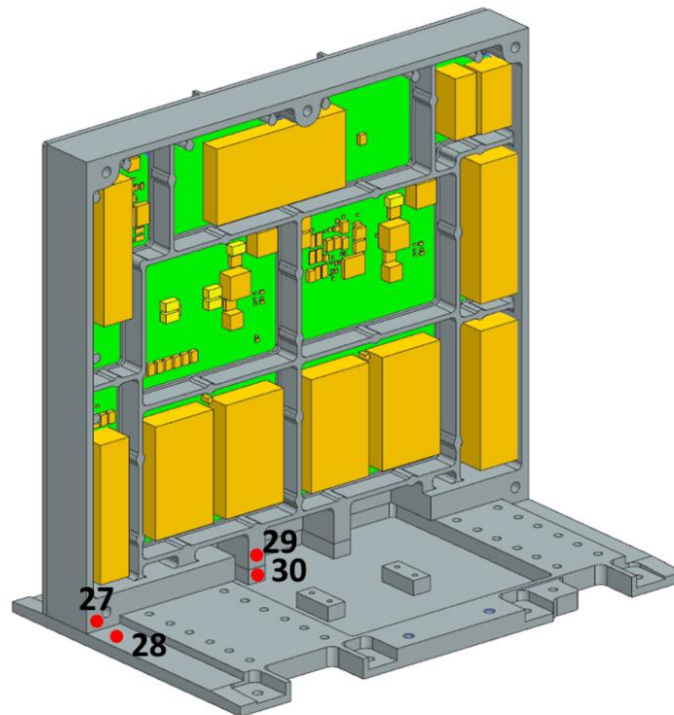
Thermocouple layout on front side of aluminum parts.
